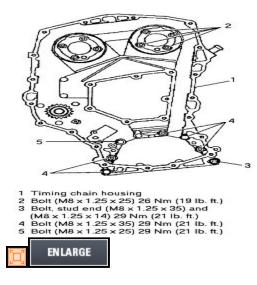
Timing chain assembly retaining bolts-2.3L and 2.4L engines
